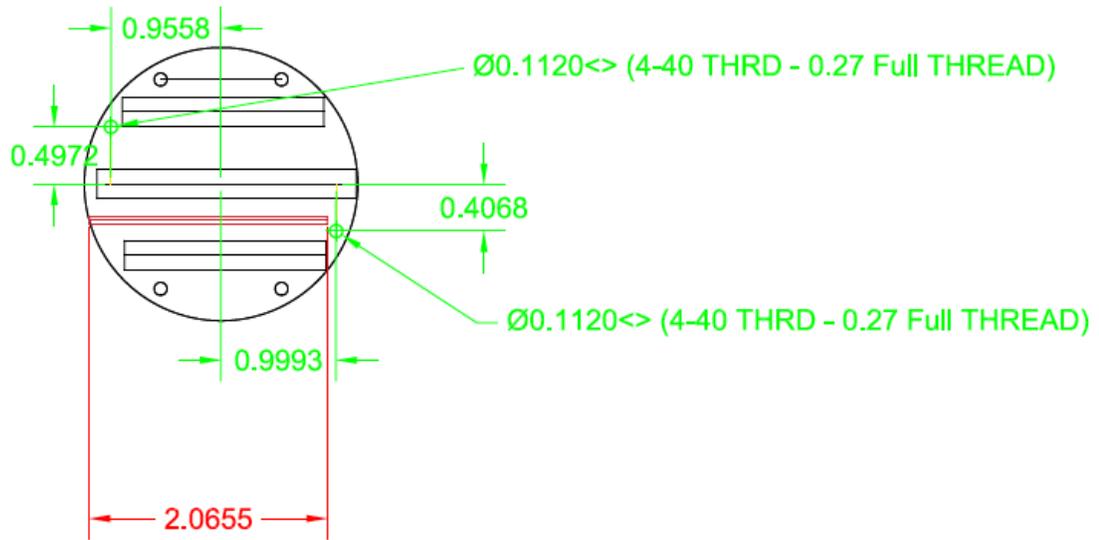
Stage design to hold cartridge heaters and thermocouple
